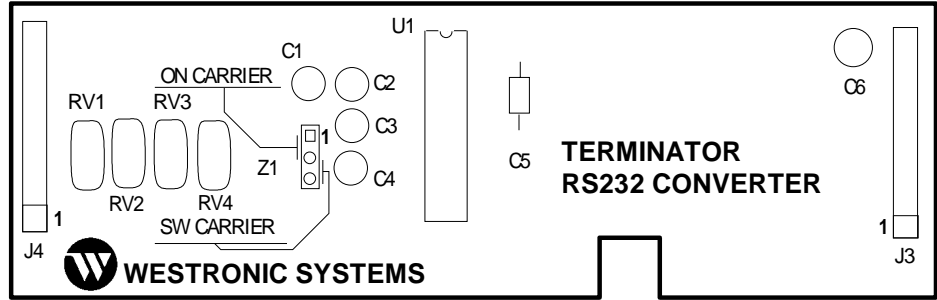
RS-232 Host Interface Board PN 535-T007 Layout
